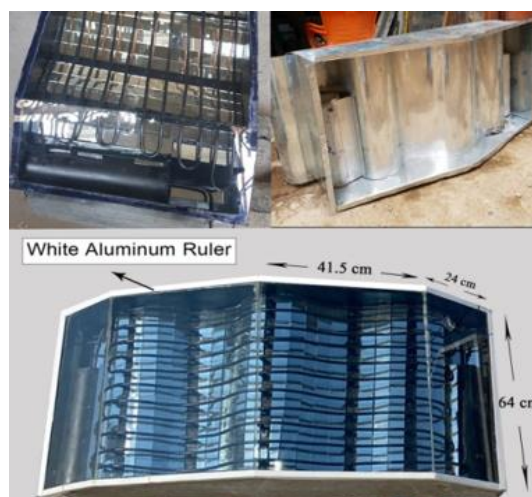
The manufacturing steps of Scccs2, and the installation location of the absorber plate and copper tube.
